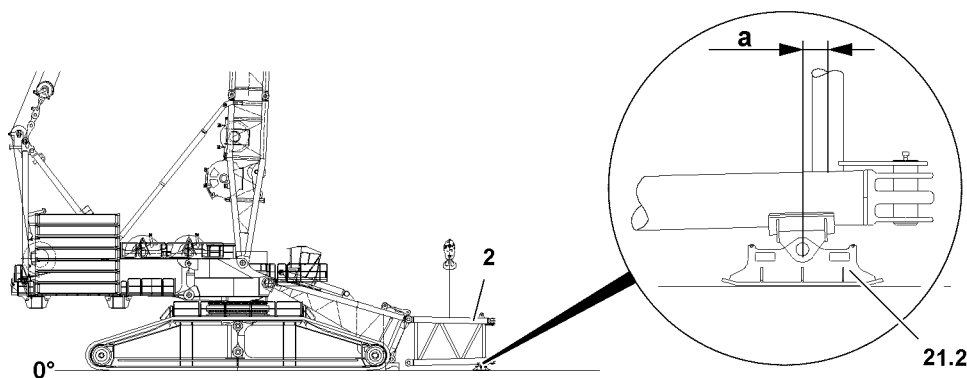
Assembling the lower P-adapter on the S-pivot section - Positioning the assembly shoe
